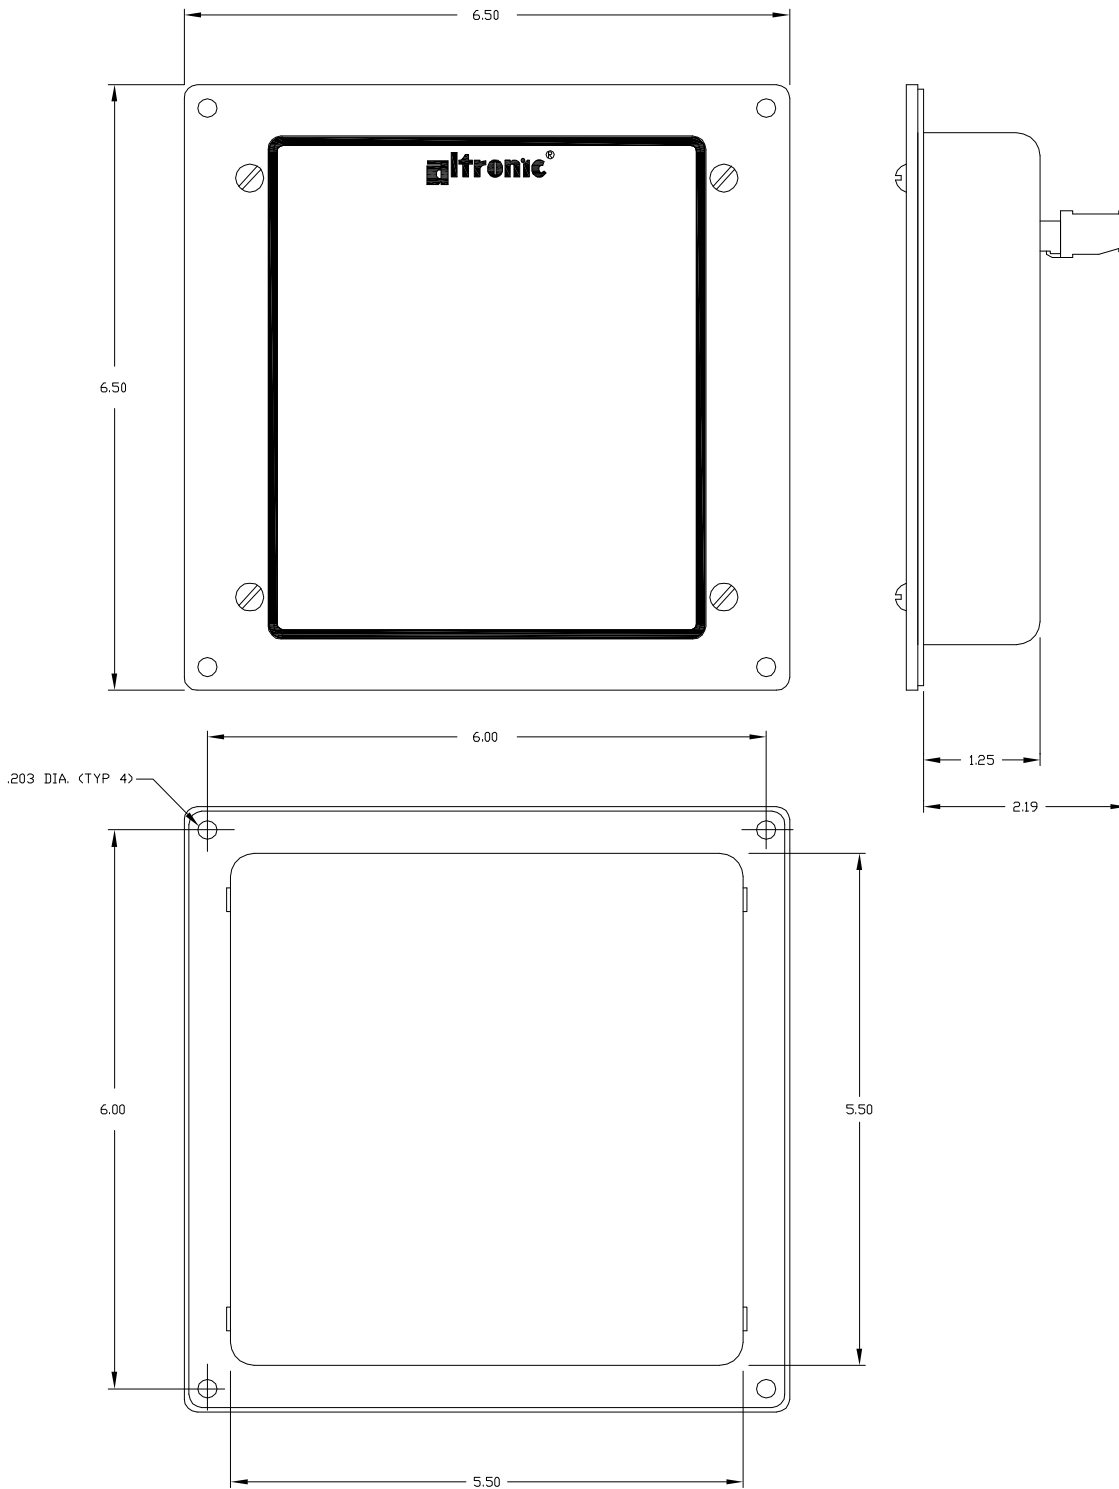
DISPLAY MODULE MOUNTING DIMENSIONS
